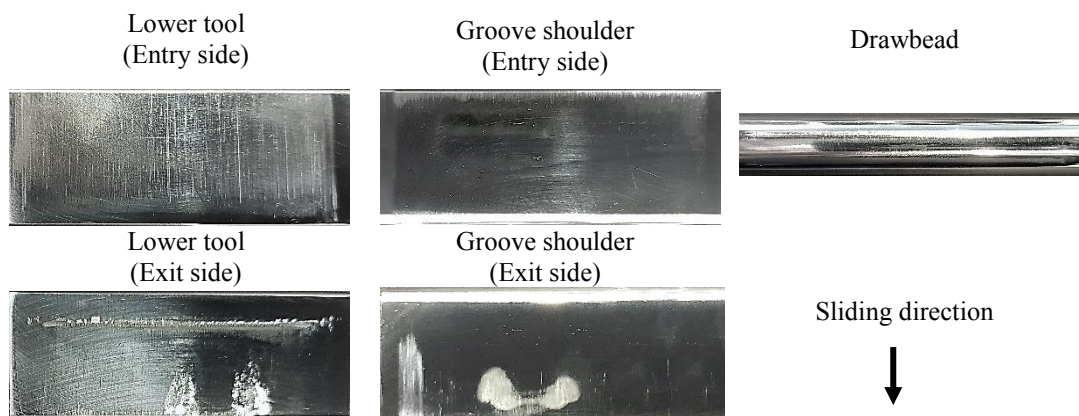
Overview of the surface structure of the drawbead tool tested with DP 980 and a 3mm bead penetration after 201 strokes.
